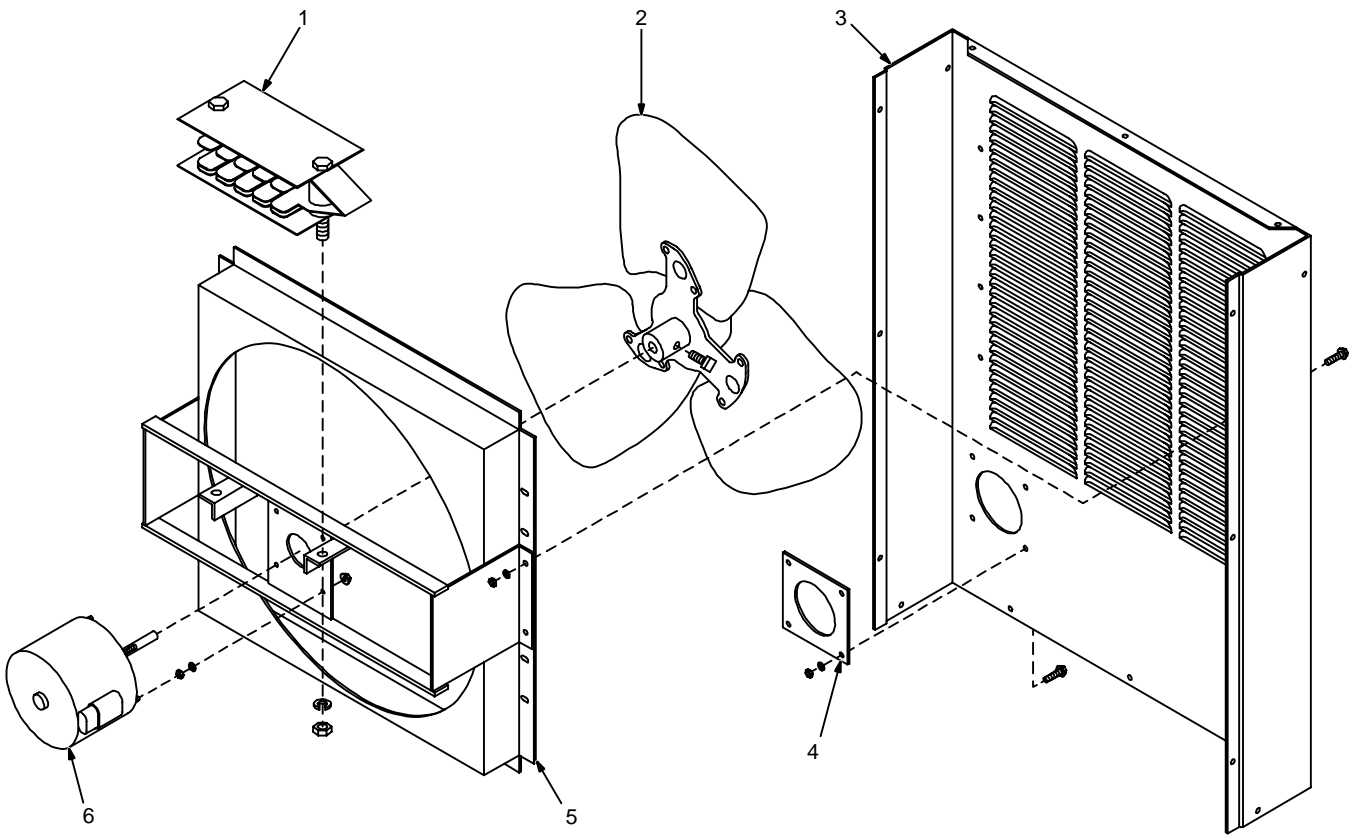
Panel, Front w/Components (1500 Model Illustrated)
